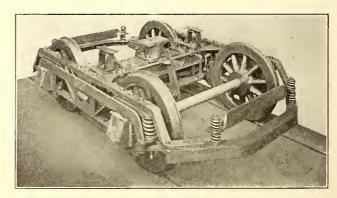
TRUCK FOR OUTSIDE HUNG MOTORS; CENTER PIN LOAD, 16,000 LB.; WHEEL BASE, 60 IN.
